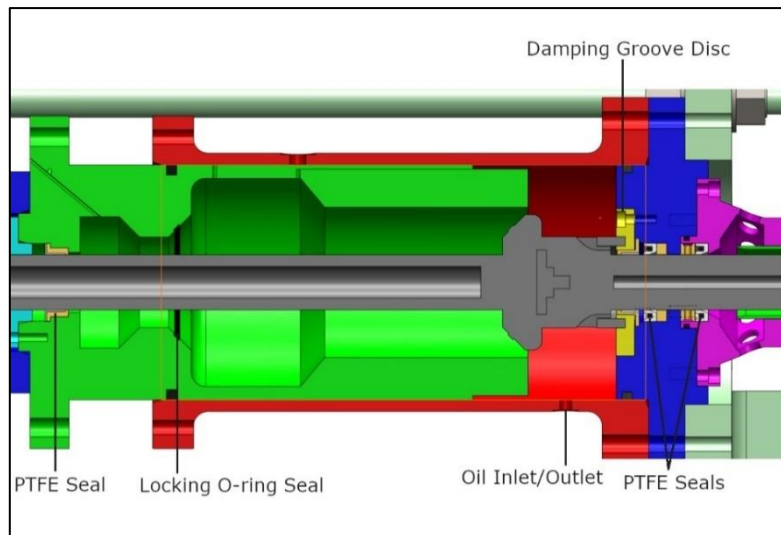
A cross-section of the University of Leeds RCM hydraulic damping and locking section. Adapted from [245].
